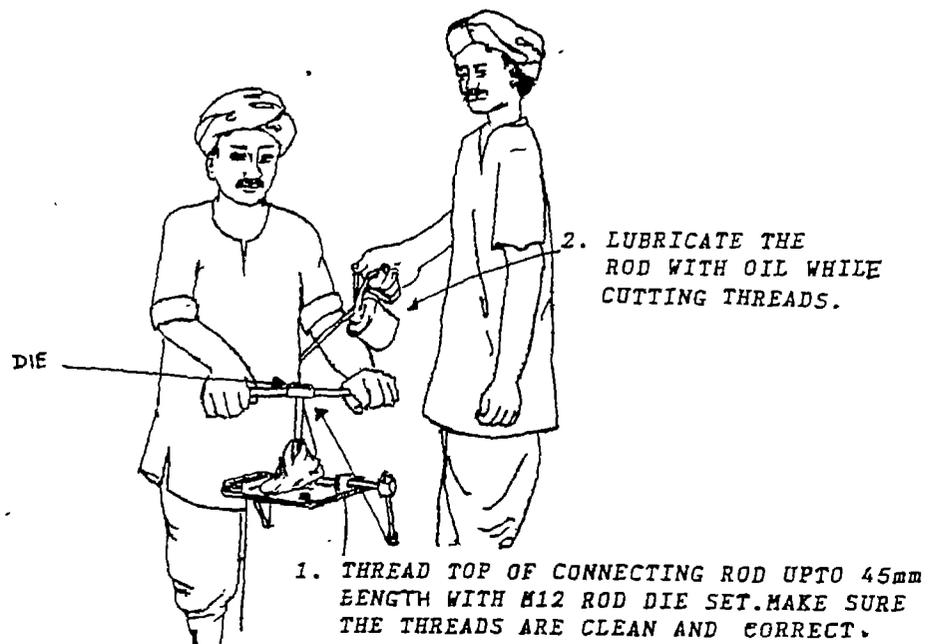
MAKE THREADS ON THE TOP MOST END.)
